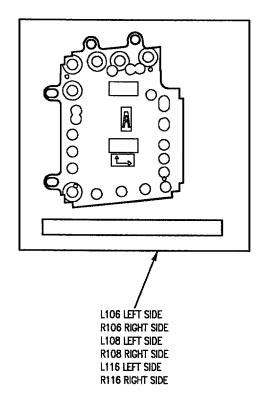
Installation of Plate Set for Drilling Door 78 Substructure (Sheet 3)
